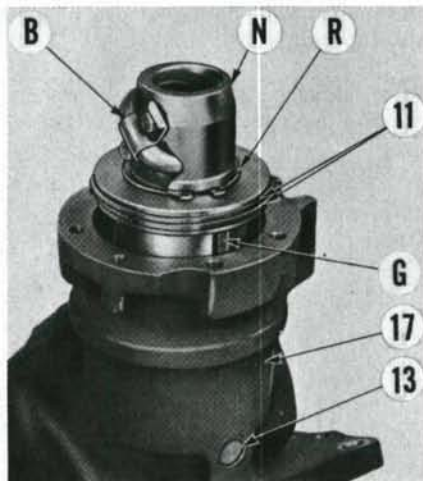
Partially disassembled view of steering gear. Refer to Fig. 9 for parts identification except for the following:
